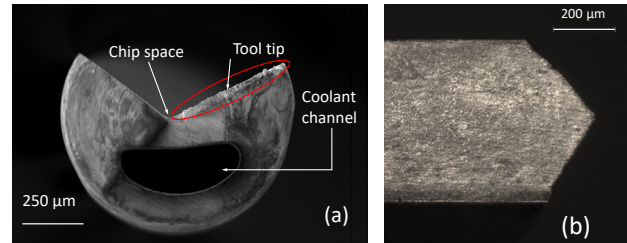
Tool wear after 500 holes represented by (a) SEM image of the tool tip and cutting edge and (b) rake face image.
